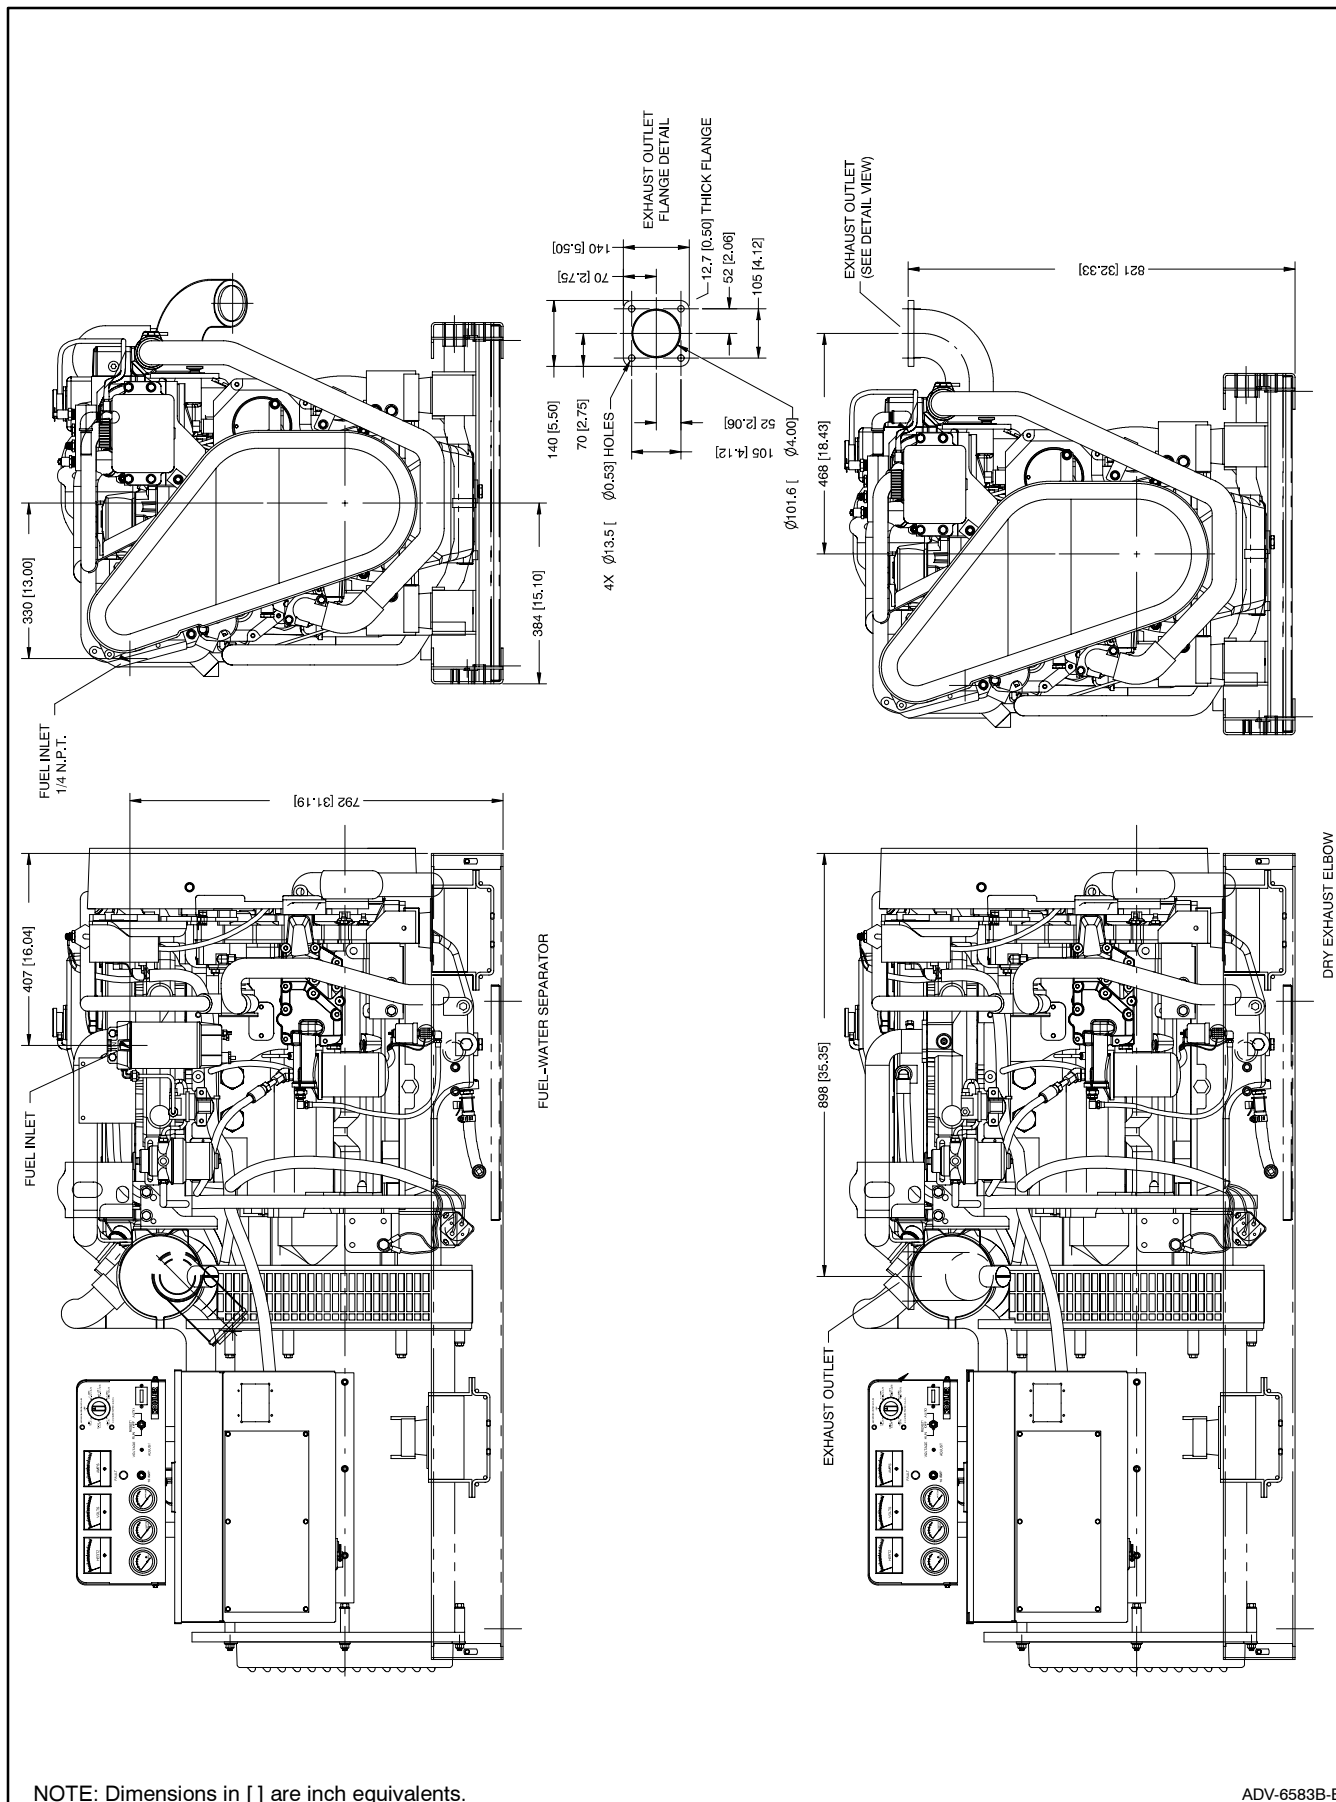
Dimension Drawing, 55EFOZ/65EOZ with Fuel/Water Separator and Dry Exhaust Elbow
